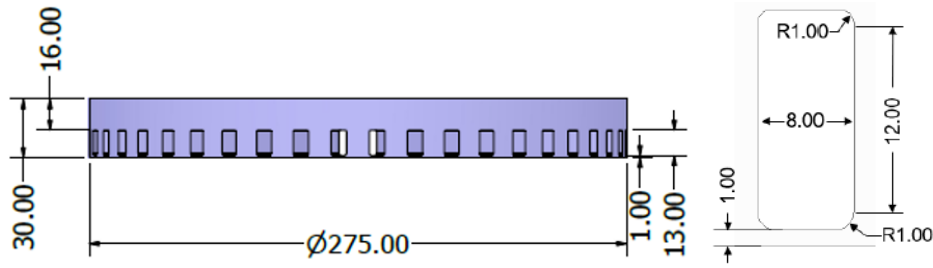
Dimensions of proposed AFIM rotor and rotor slot dimensions.
